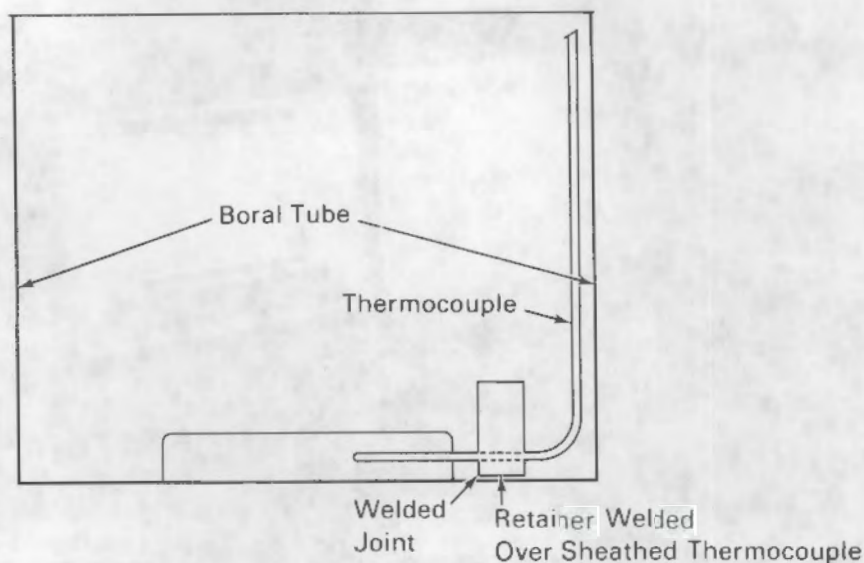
Method Used to Attach Thermocouples to Basket Bottom
